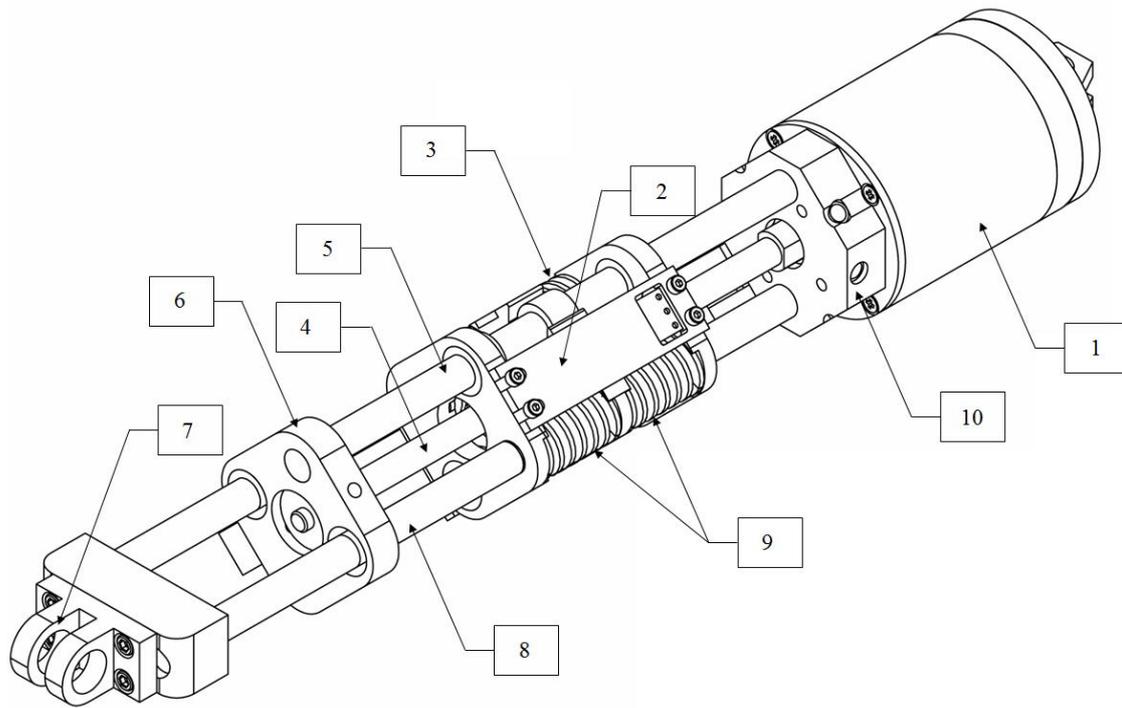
Electric SEA (1) DC motor with gearbox; (2) moving sub assembly, (3) ball nut plate, (4) ball screw, (5) guide rod, (6) support plate; (7) load connection terminal, (8) moving rod, (9) and springs (10) motor angle and rods plate (Pratt et al., 2002).
